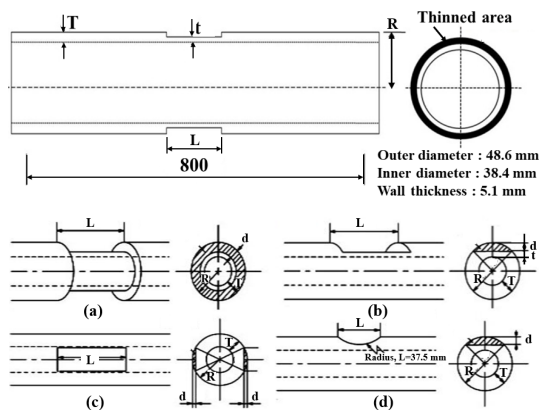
Pipe specimen geometries with wall thinning. (a) Circumferential flaw, (b) Single plane flaw, (c) Double plane flaw, (d) Arc flaw
